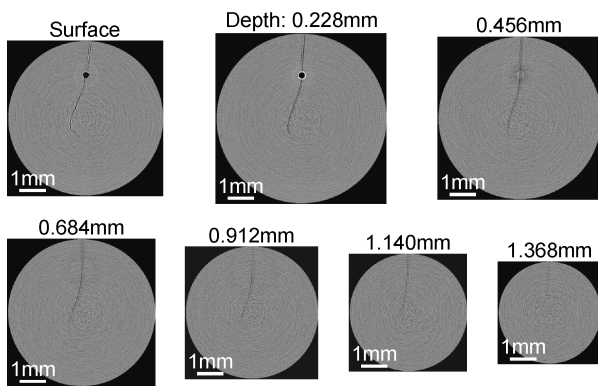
Reconstructed slice images of the fatigue crack with various elevations.
